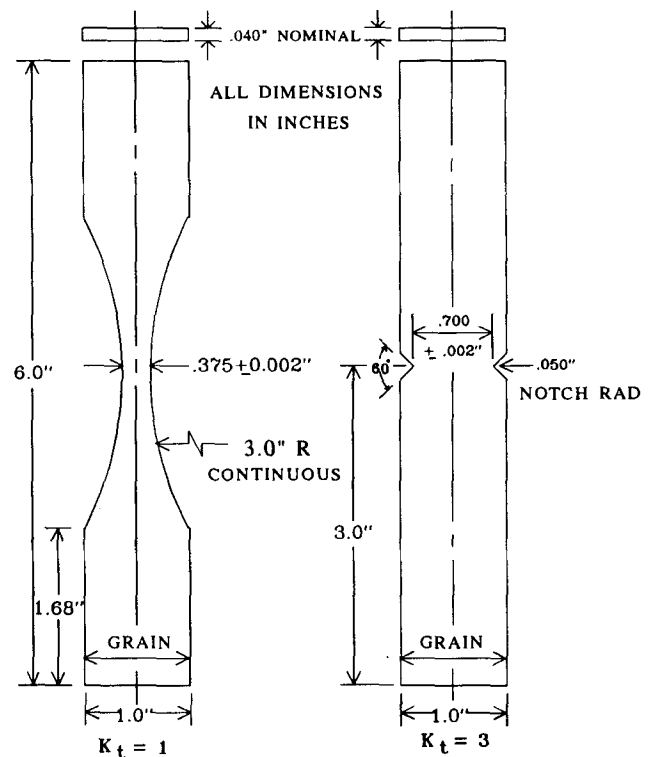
Test specimen geometry (1" = 2.54 cm).
